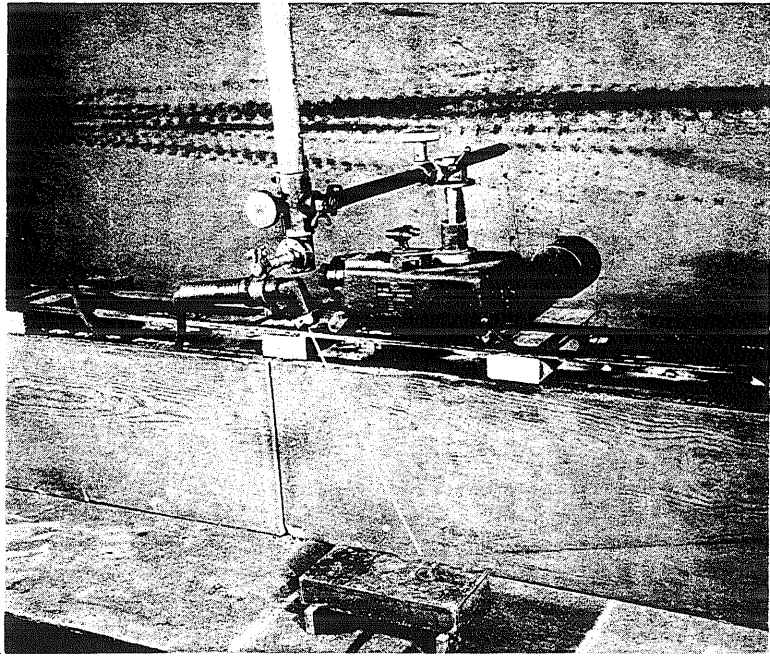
Photograph Showing Semiautomatic Welding Equipment
